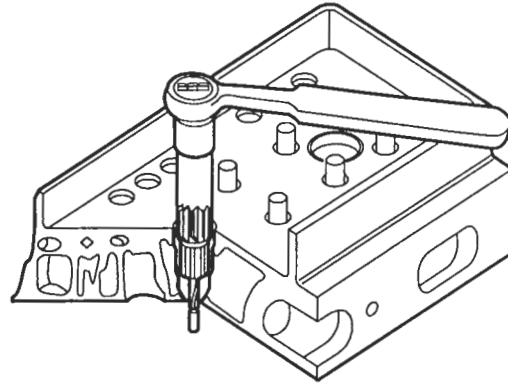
Reaming Injector Tube for Injector Body Nut and Spray Tip with Tool J 22525-1
